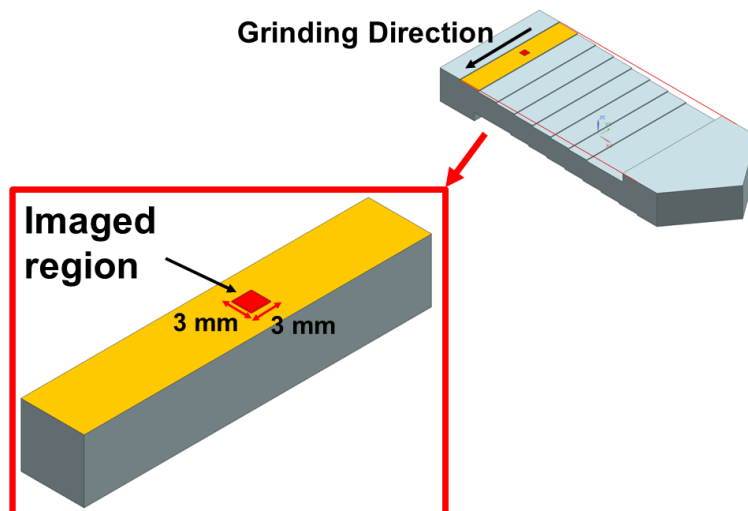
shows the schematic of the measurement plan using the technique described in Section 3.1.7.
